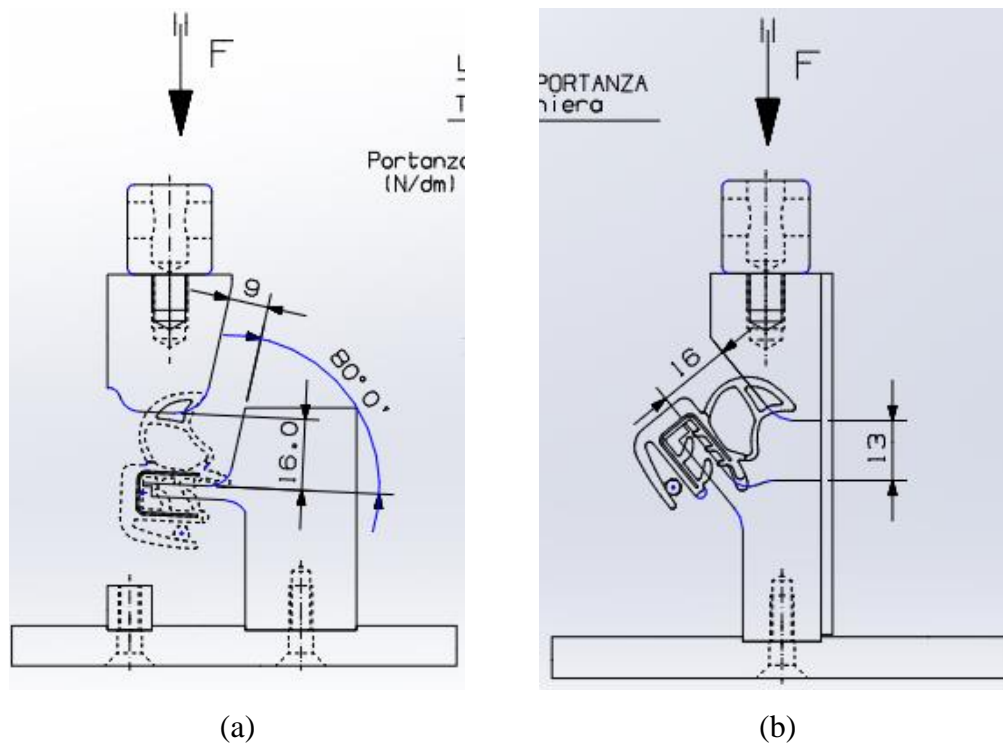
Sketches of tests which will be performed on primary seal – (a), 1st Test;
